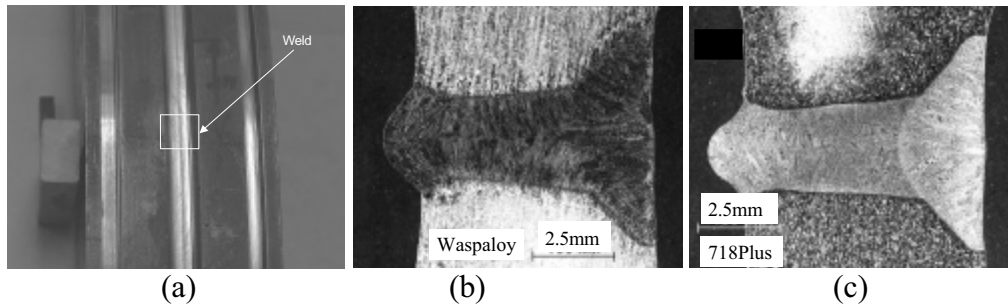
EB welding of 890 mm diameter rolled rings, (a) typical weld location for 718, Waspaloy, and 718Plus welds and typical welds for (b) Waspaloy, and (c) 718Plus.
